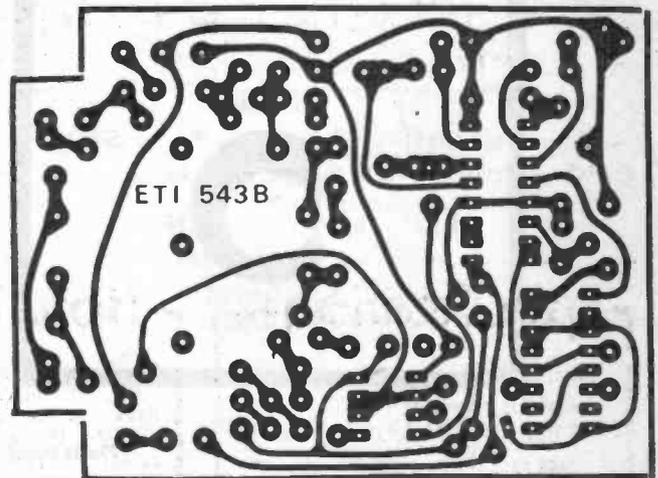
Printed circuit pattern for the timing board. Full size 83 x 61mm
